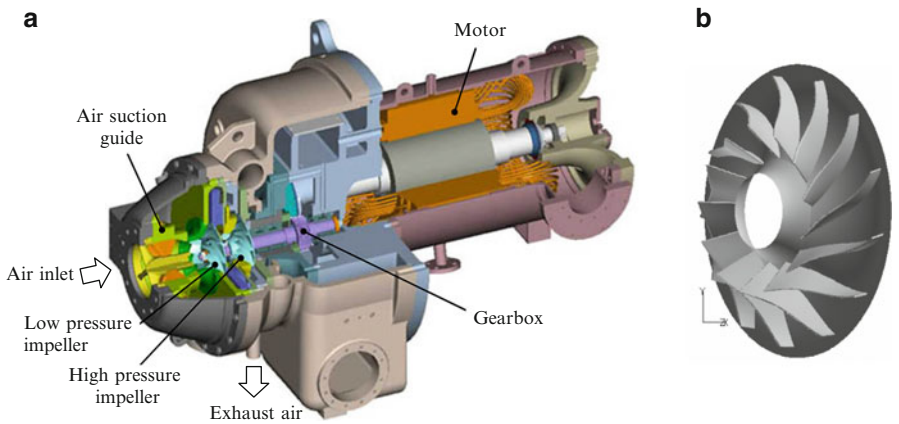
Internal structure of the micro centrifugal compressor: (a) micro centrifugal compressor and (b) impeller of the compressor
